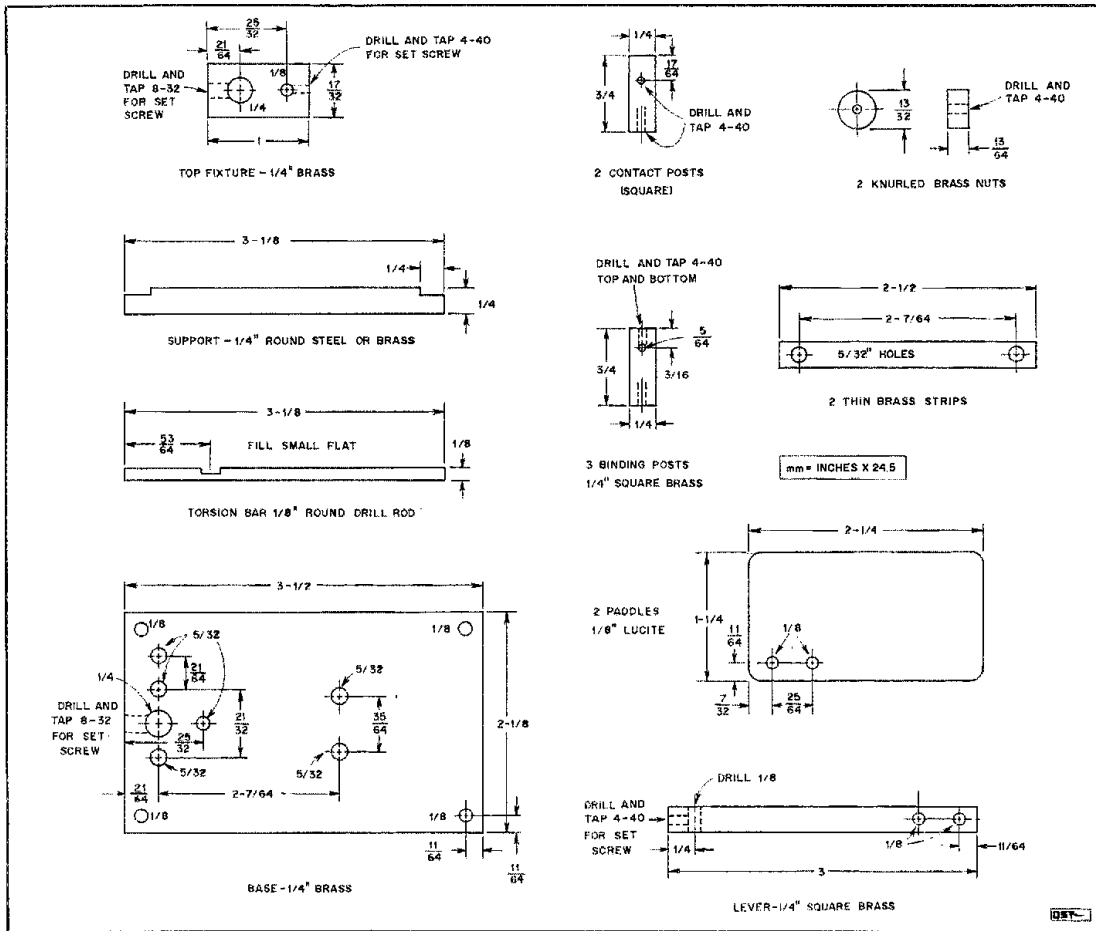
Parts for the Torsion Bar Key. Dimensions given are in inches (mm = inches × 25.4).
